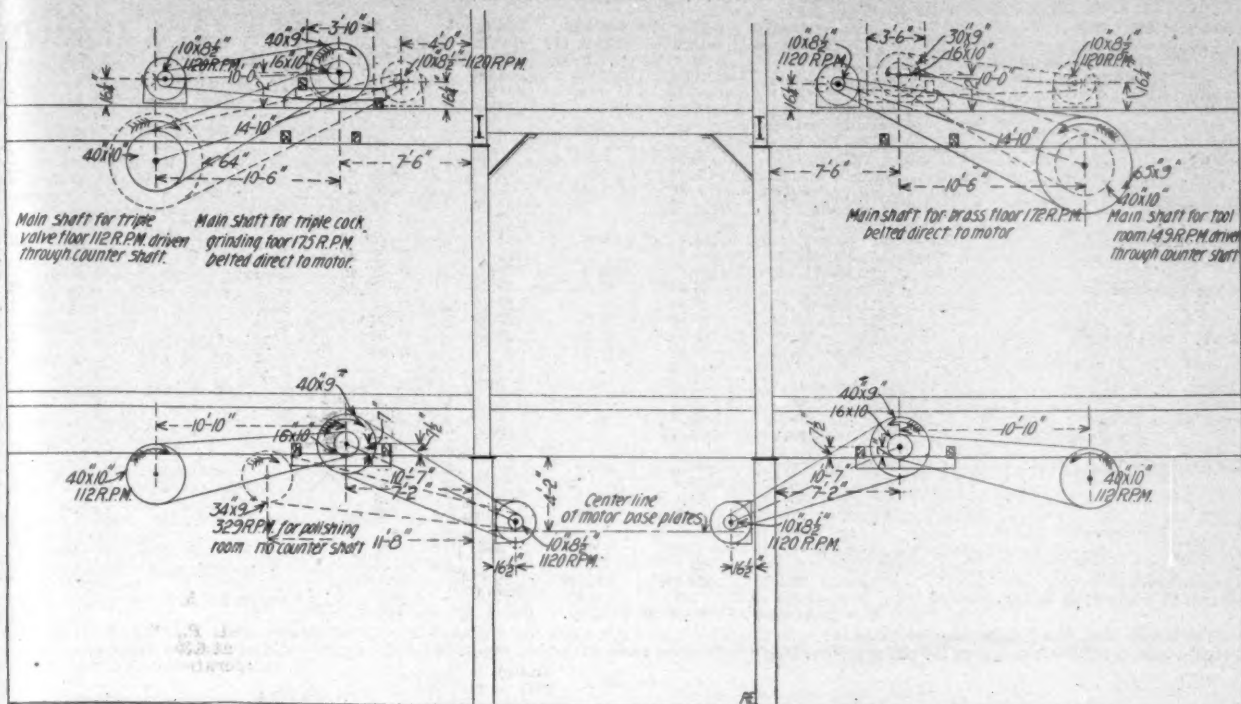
Arrangement of Motor Drives in Machine Shop.
